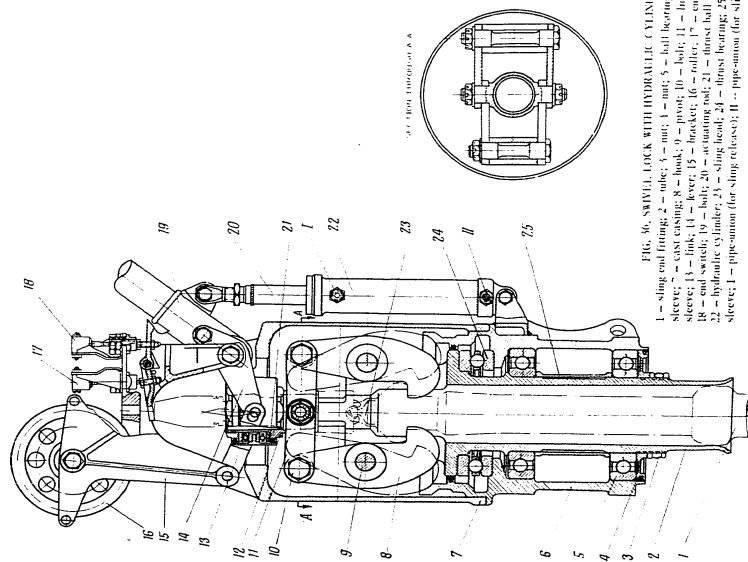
SWIVEL LOCK WITH HYDRAULIC CYLINDER
